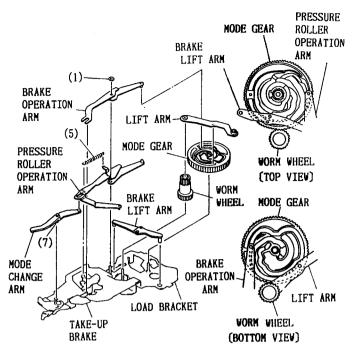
Brake Operation Arm, Mode Gear, Worm Wheel, Pressure Roller Operation Arm, Mode Change Arm and Brake Lift Arm
